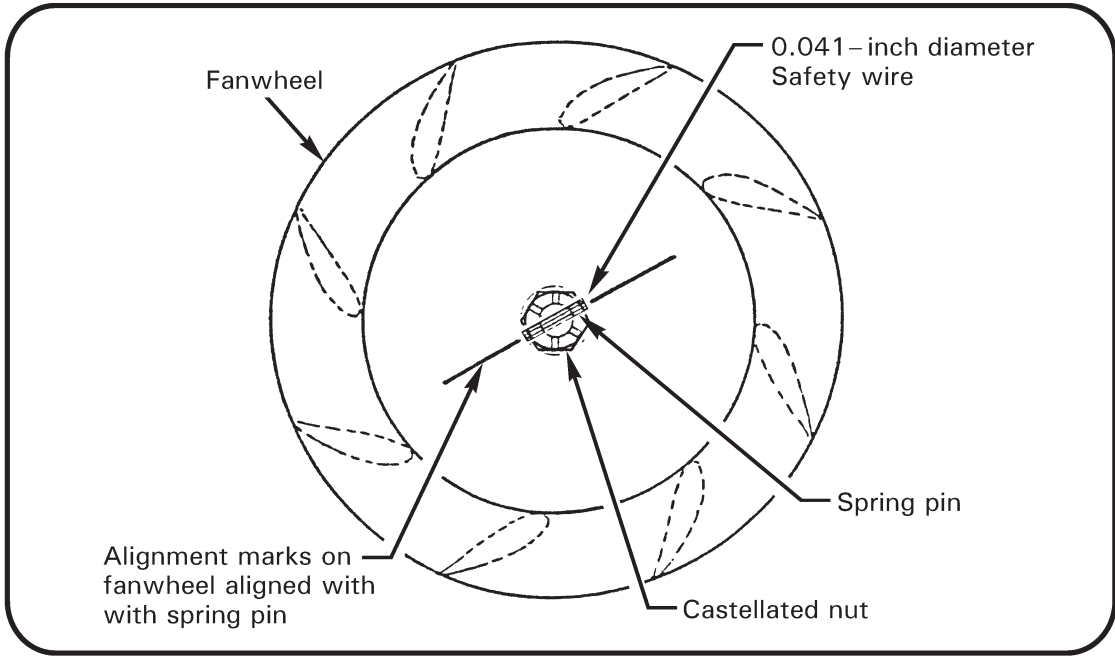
FANWHEEL ALIGNMENT MARKS
